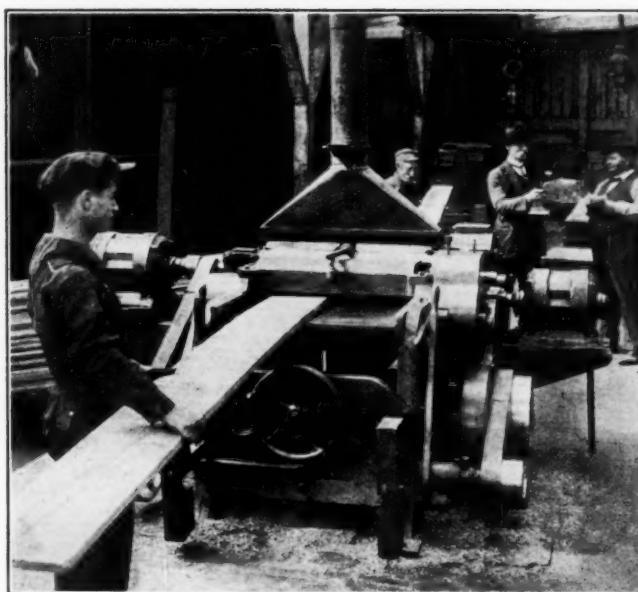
MOTOR-DRIVEN DOUBLE SURFACE PLANER WITH MOTORS ON BRACKETS AND DIRECT CONNECTED TO CUTTER HEADS BY FLEXIBLE COUPLINGS
